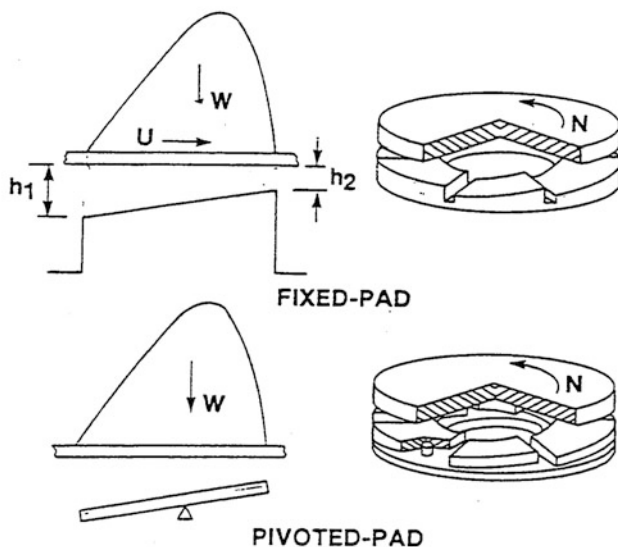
Thrust bearings (Courtesy of Siemens)
